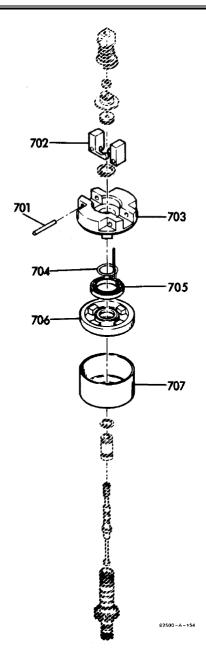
Spring Driven Oil Damped Ballhead (Optional) [sold as an assembled unit only]
